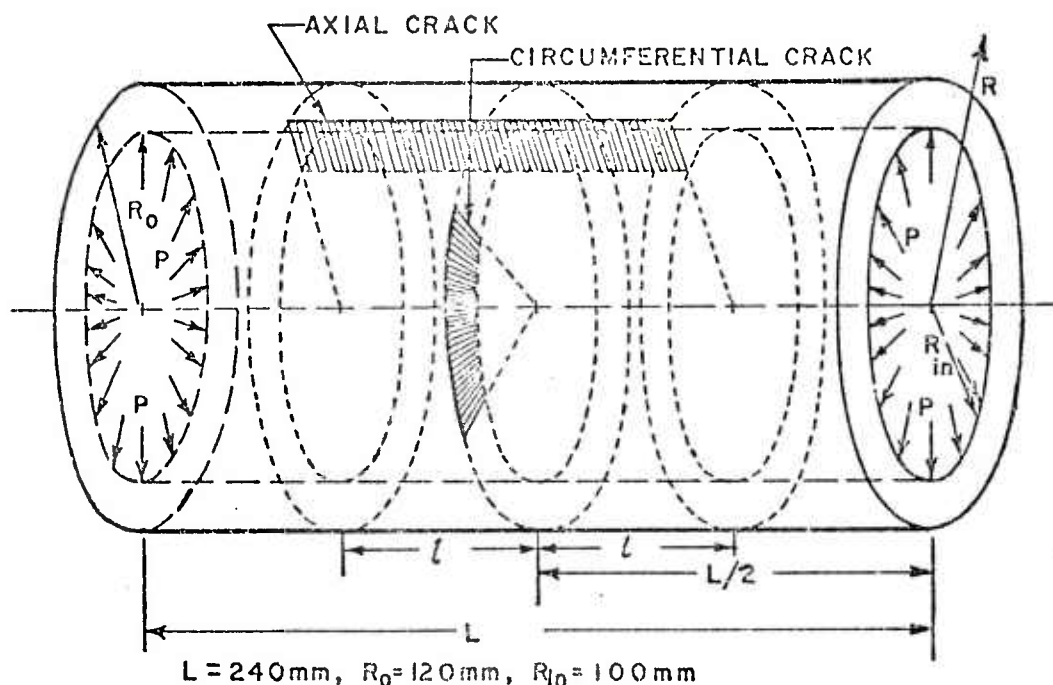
Geometry of the Axial and Circumferential Cracks in the Wall of a Section of Cylindrical Pipe
